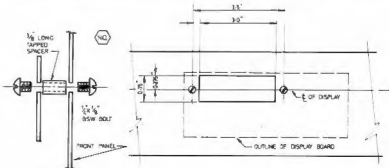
DETAIL OF DISPLAY MOUNTING USING ALTERNATIVE MOUNTING HOLES
